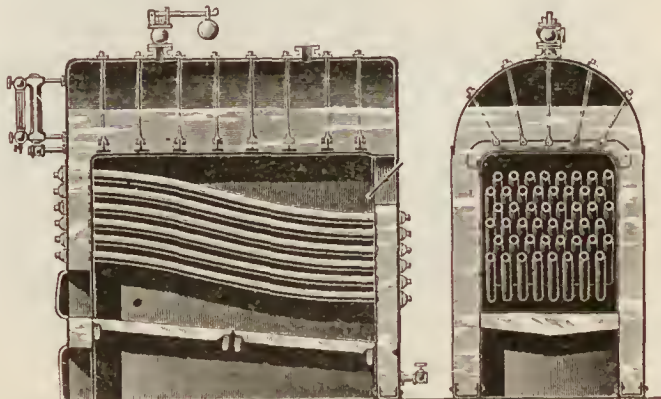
THE STEPHEN WILCOX BOILER, 1856.
